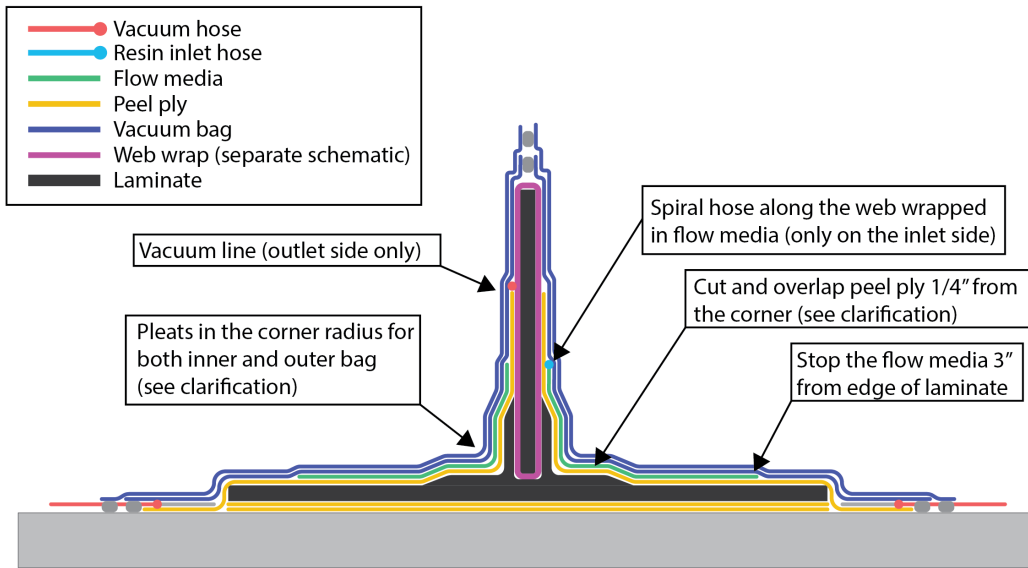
Schematic used for vacuum bagging the co-curing.
